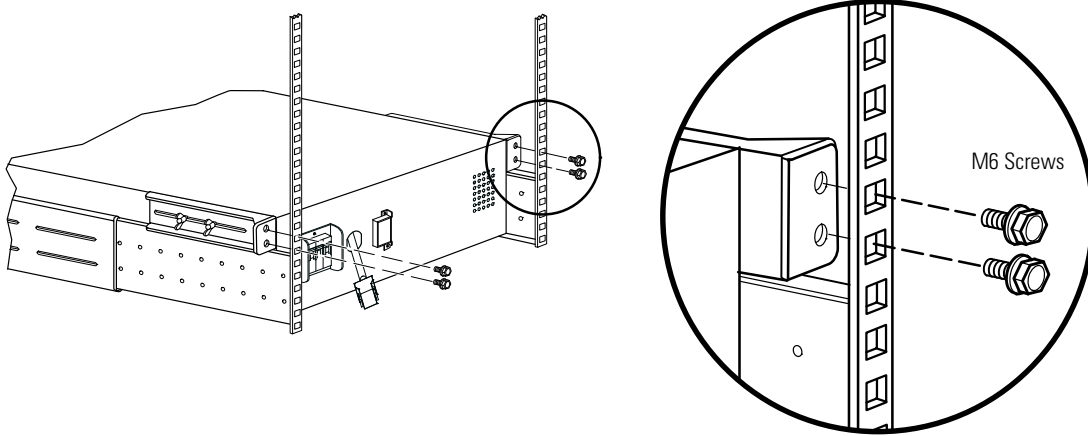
Securing the Optional EBM Seismic Mounting Brackets
